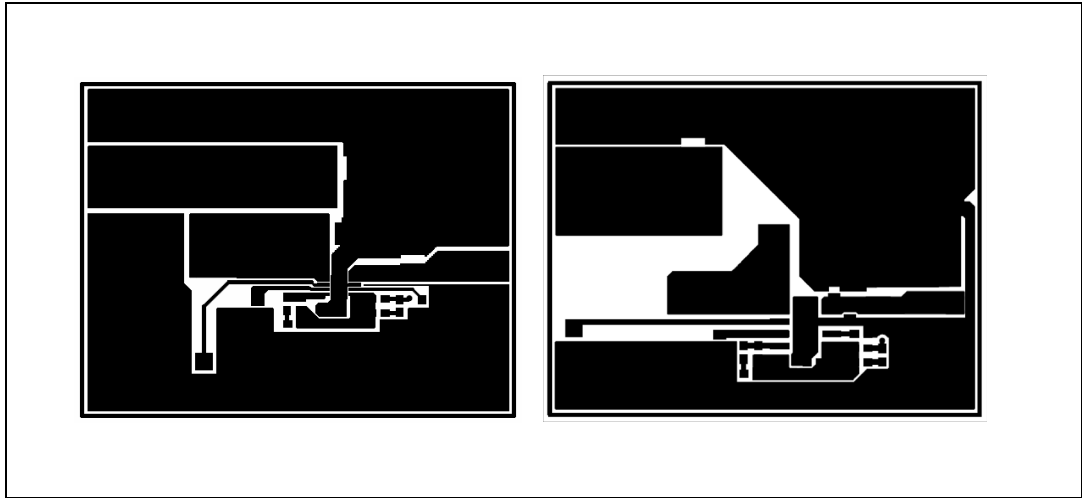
PCB layout: L5987 and L5987A (bottom side)
